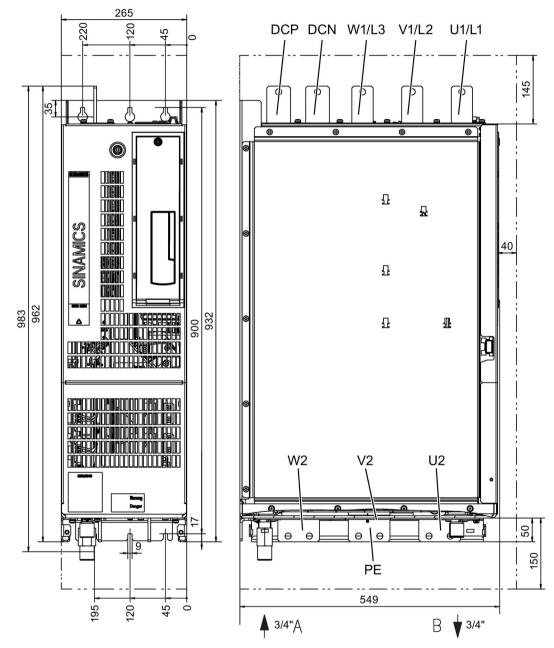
Dimension drawing Power Module, frame size GL. Front view, side view
